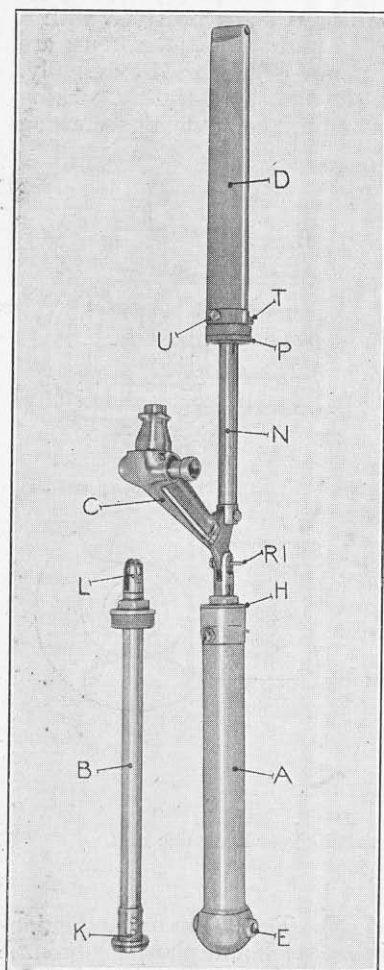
Undercarriage retracting hydraulic ram and balance cylinder (port).
